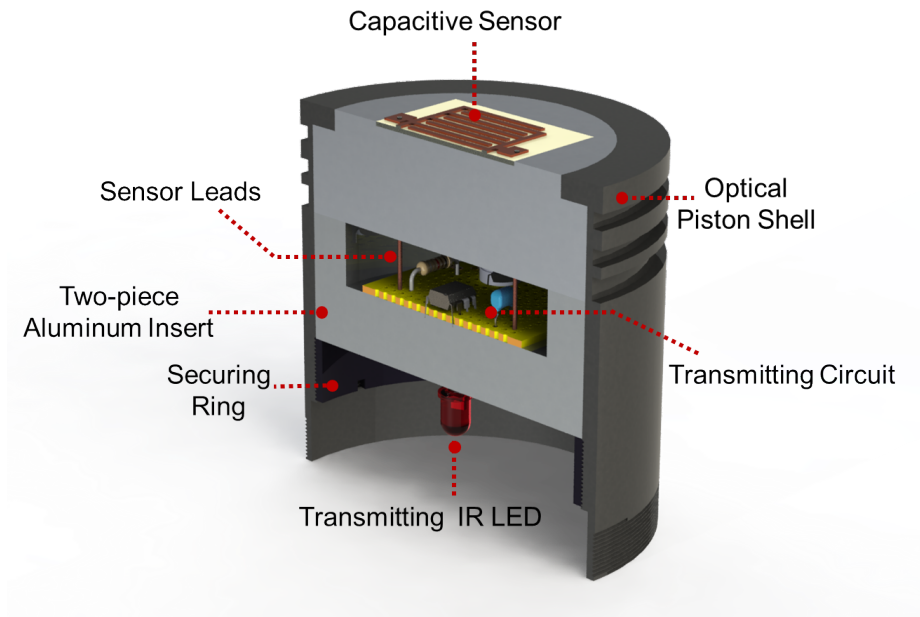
Cross-sectional view of the CAD model for the instrumented piston with the mounted capacitive sensor and non-contact data transmission circuit
